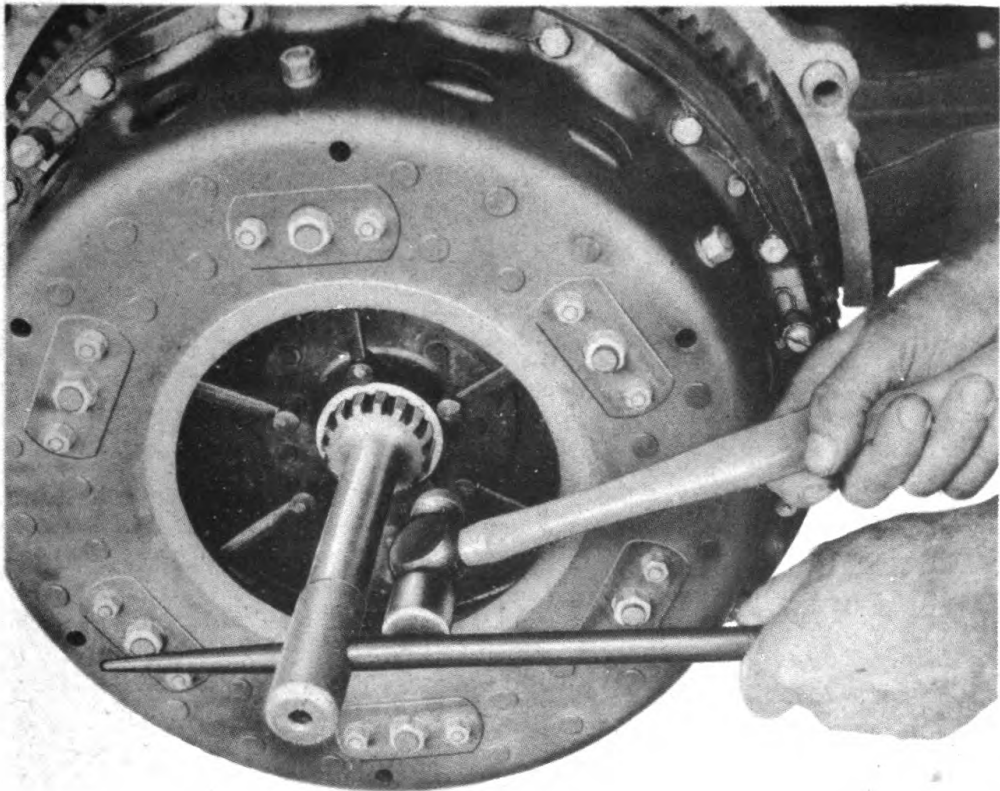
Clutch With Alining Tool (41-T-3083-75) Installed
